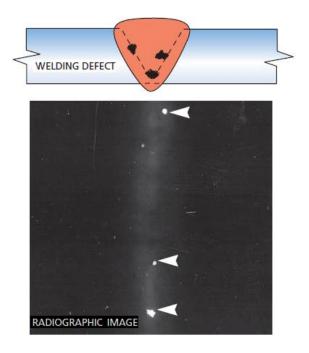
Weld with tungsten inclusion. Adapted from Jeffus. (2012)
